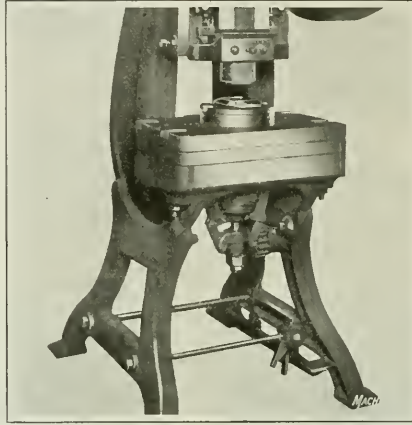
Press equipped with Spring-pressure Attachment shown in Fig. 1
